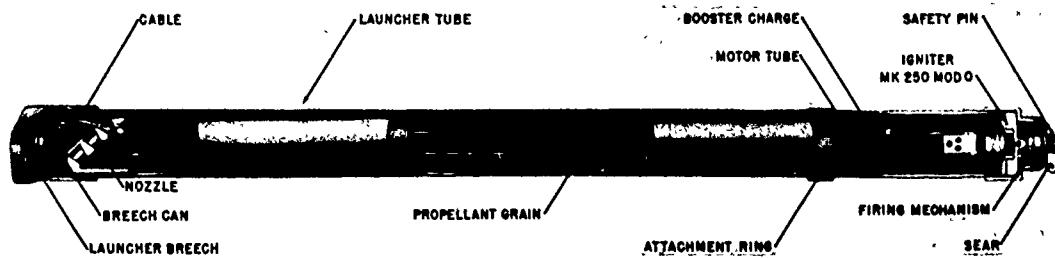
Cutaway View of Rocket Catapult Mk 1 Mod 0.
